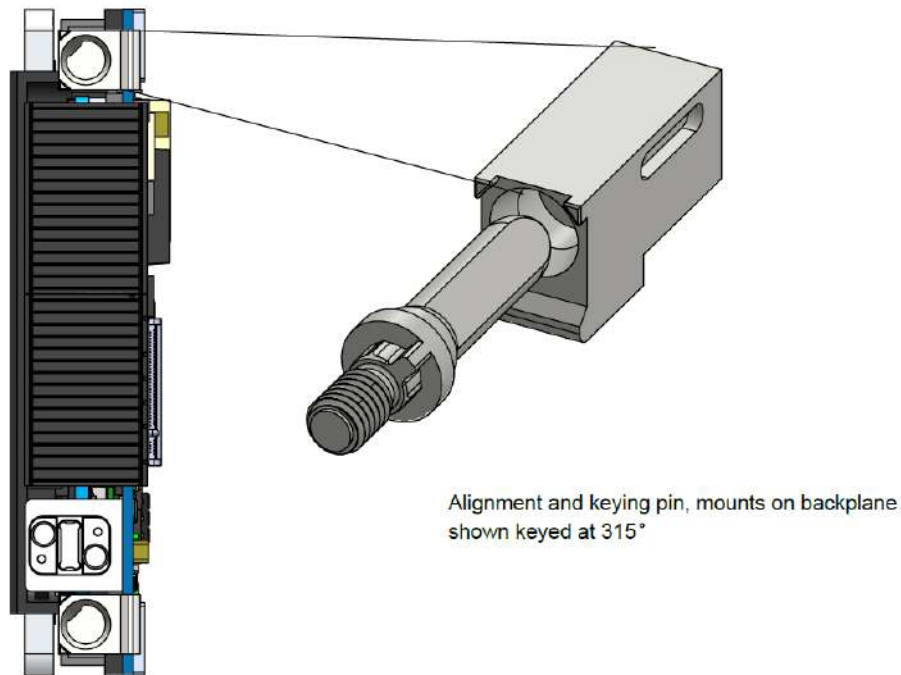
3U-VPX Plug-in Module Mechanical dimension – Side View
